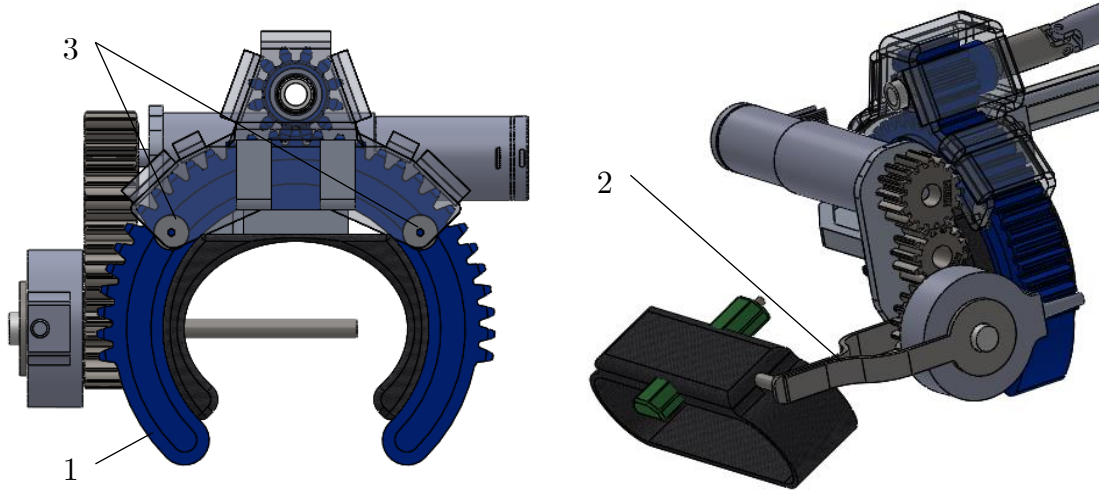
Wrist pronation-supination mechanism. (1) wrist gear, (2) hand bar, (3) bearings.
